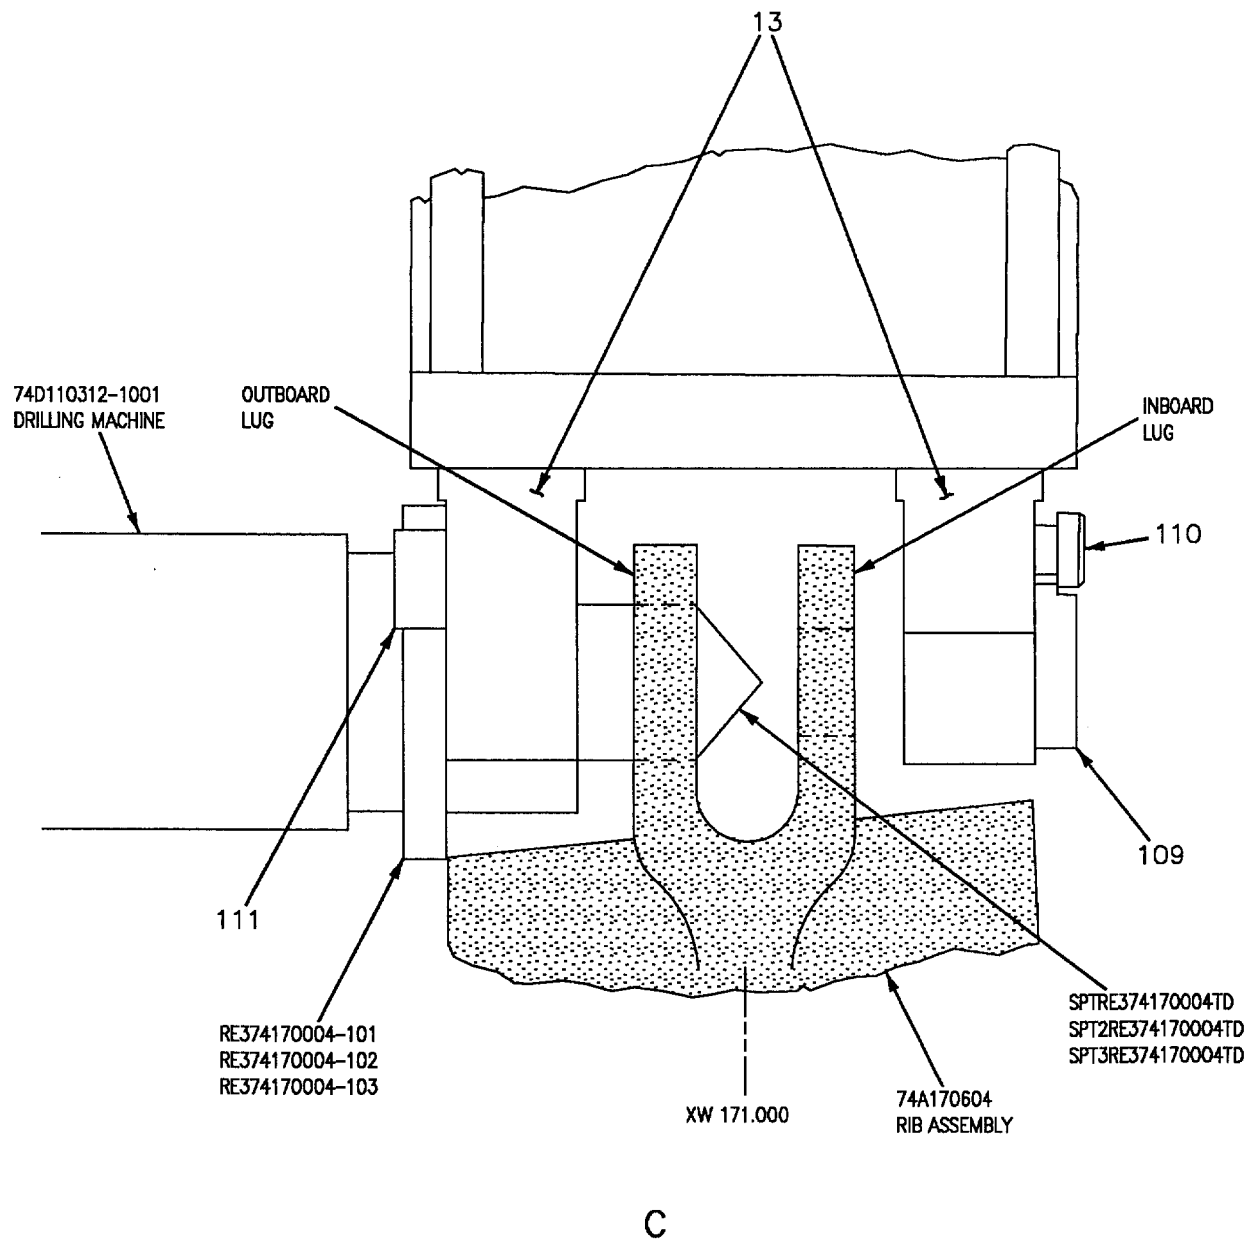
Bushing Replacement at 74A170604 Rib Assembly (Sheet 4)
